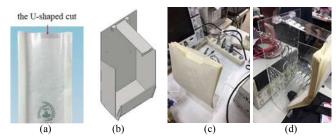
The paper bag area of the fruit bagging mechanism: (a) The bag for bagging; (b) the CAD model; (c) the L-shaped hook securing bag opening groove; and (d) the side view of the mechanism
